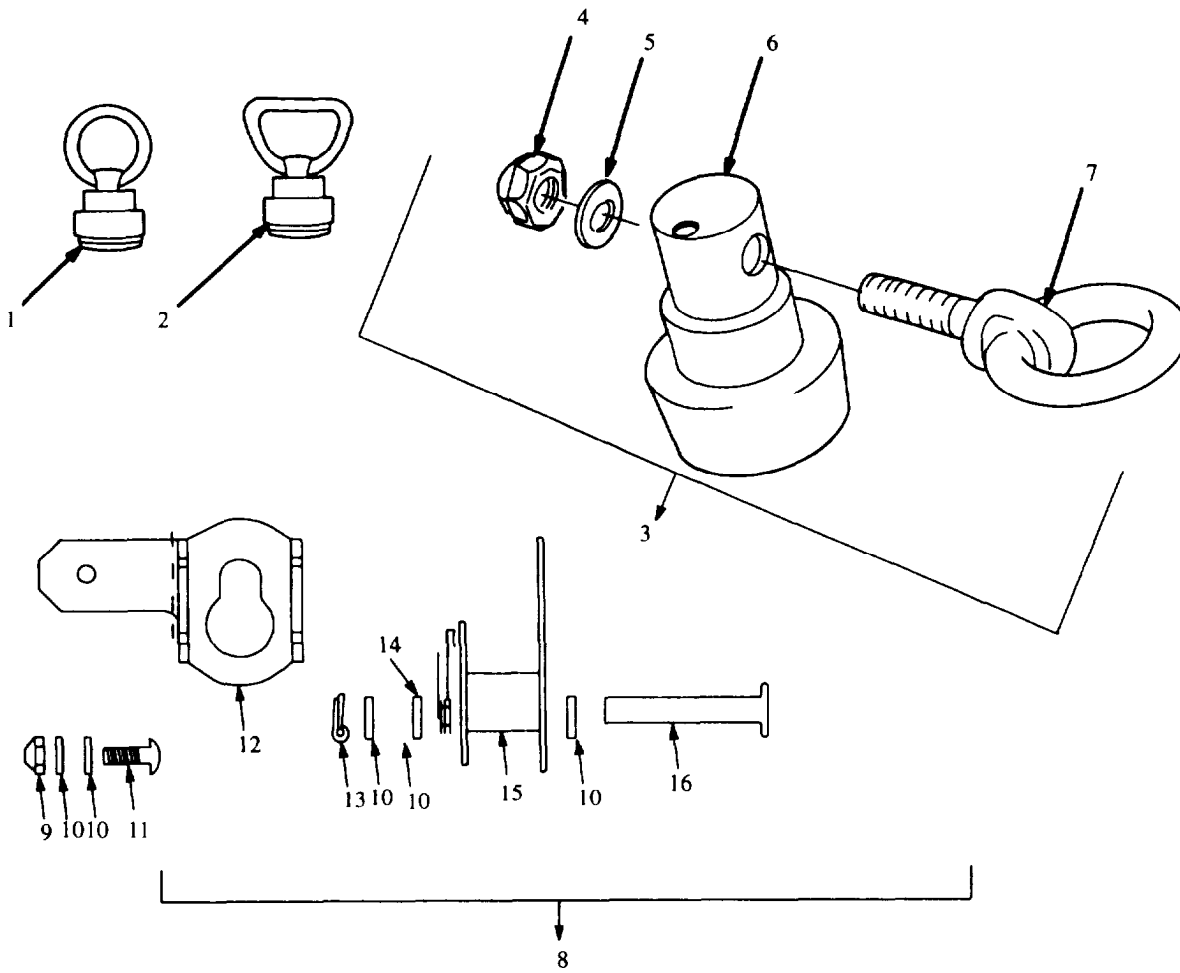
Approved Quick-Disconnect Adapters Floor Fitting
